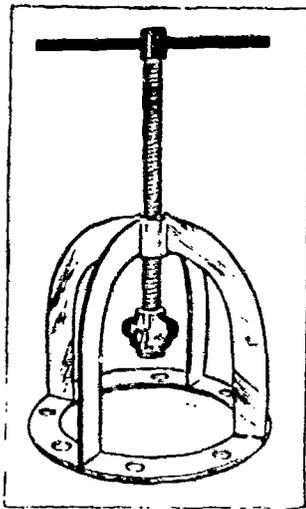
Model 2478 Front Wheel Hub Puller.
